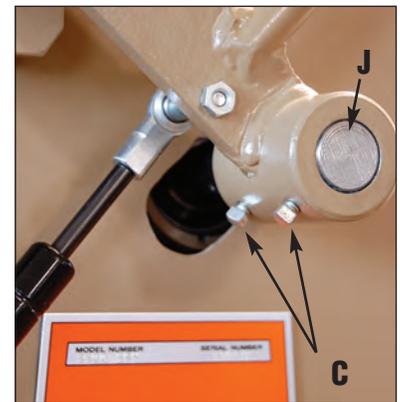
Square Head Screws "C" holding the Upper Pulley Shaft "J". Loosen these to remove the Upper Pulley Assembly.
